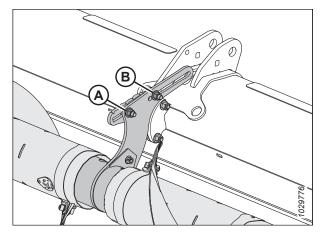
Initial Position of Adjustable Mounts – Two-Piece Auger
